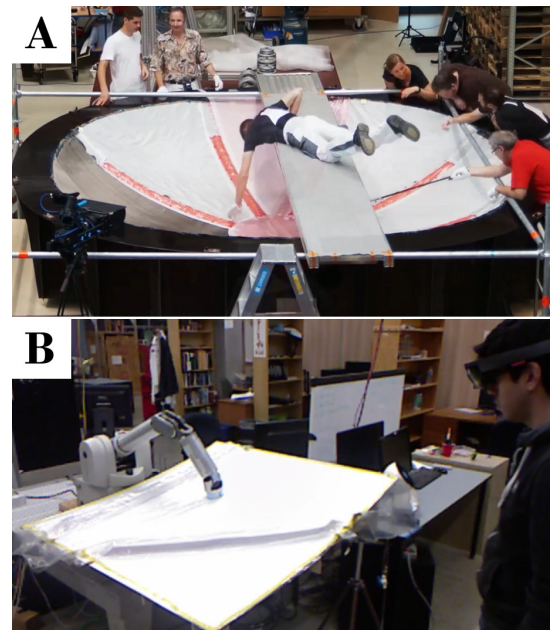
(A) Expert working on the manufacturing of a CFRP Pressure bulkhead (image courtesy of DLR). (B) Prototype of a section of the bulkhead mold.
